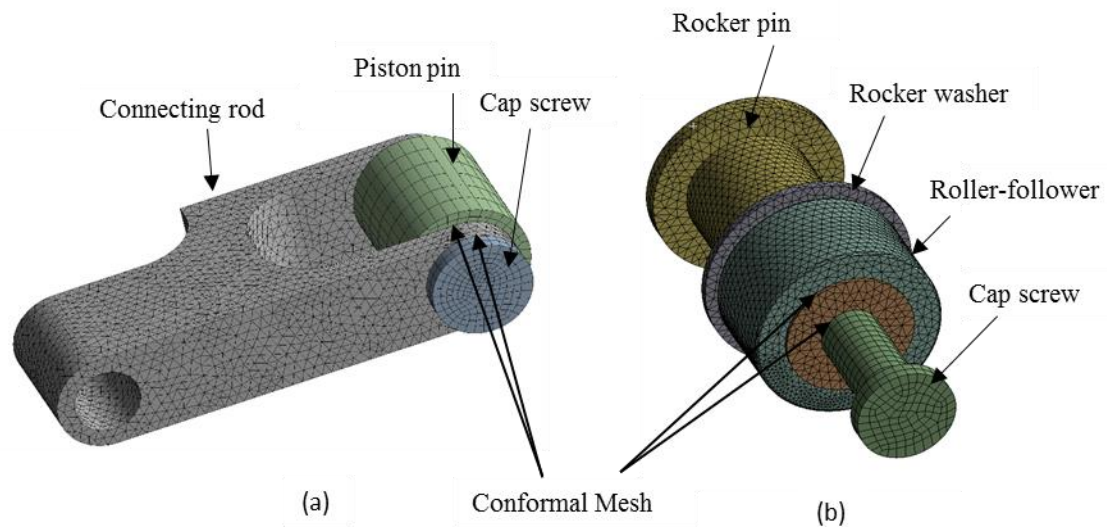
conformal mesh on (a) connecting rod, screw, piston pin and bushing (b) follower, screw, rocker pin and washer
